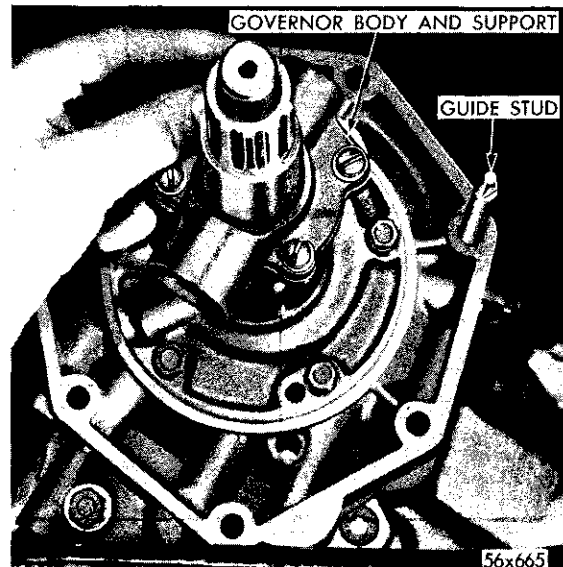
Removal and Installation of Governor Body and Support Assembly
